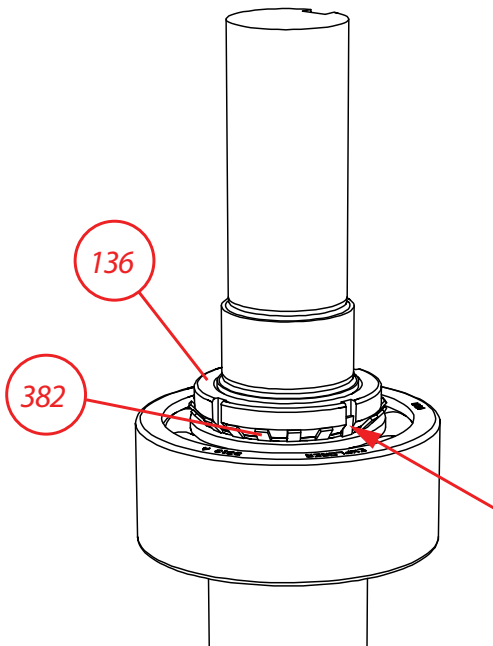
Bend in locking tab in lock washer (382) after bearing (112C) has cooled to ambient
